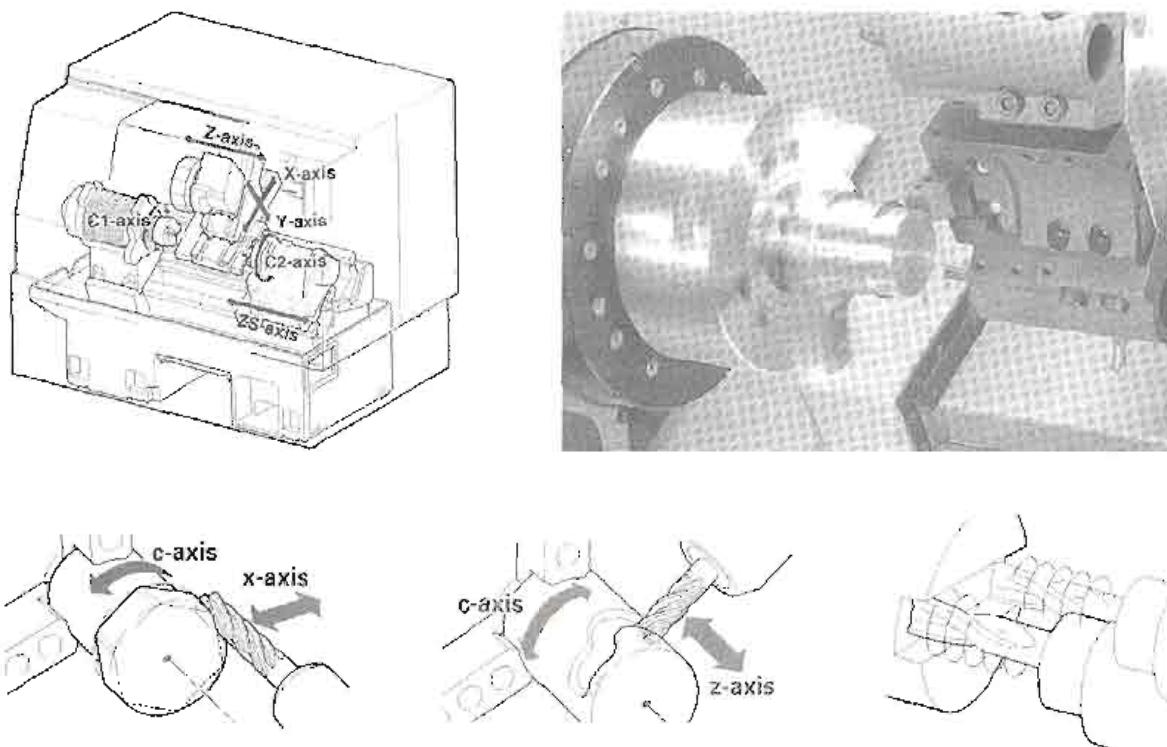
This CNC turning center has a multiple-axis capability with two spindles and a 12-tool turret with X, Y, and Z control as well as axis control of the spindles.
